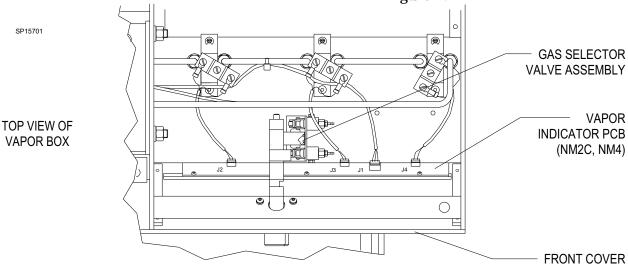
VAPOR BOX - 3 AND 4-GAS MACHINES
